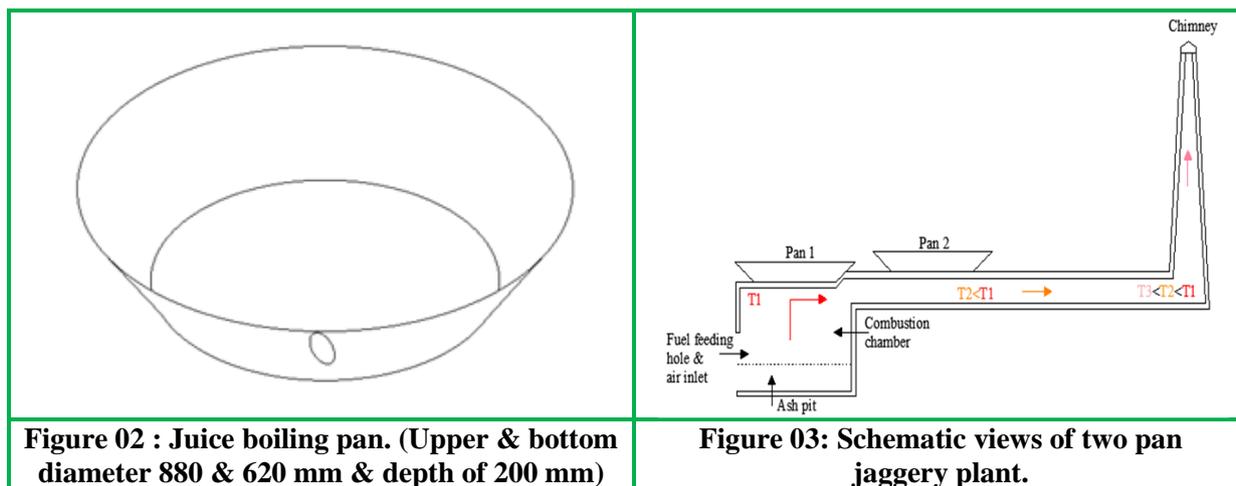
Juice boiling pan. (Upper & bottom diameter 880 & 620 mm & depth of 200 mm)
